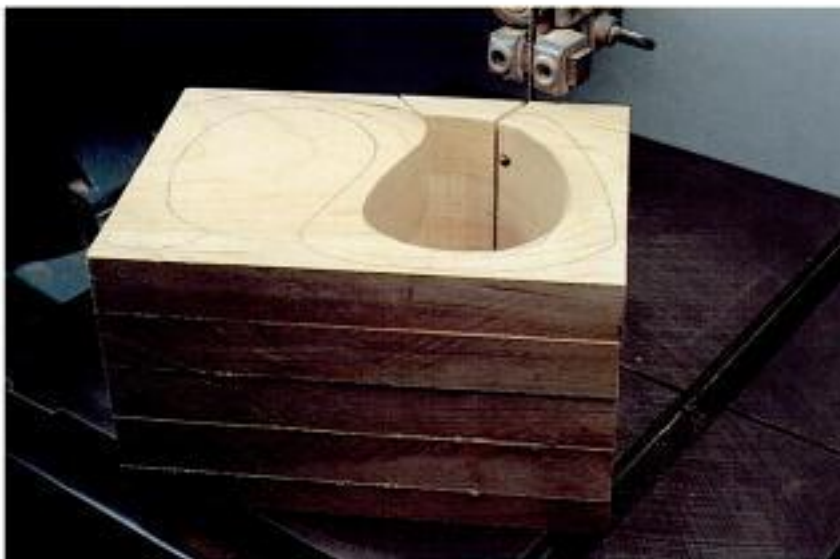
On the *Boa* and *Cobra* designs, you will need to back out of the round drawer cuts, remove the blocks, then cut the waste piece off to open the end of the drawer cavity.
